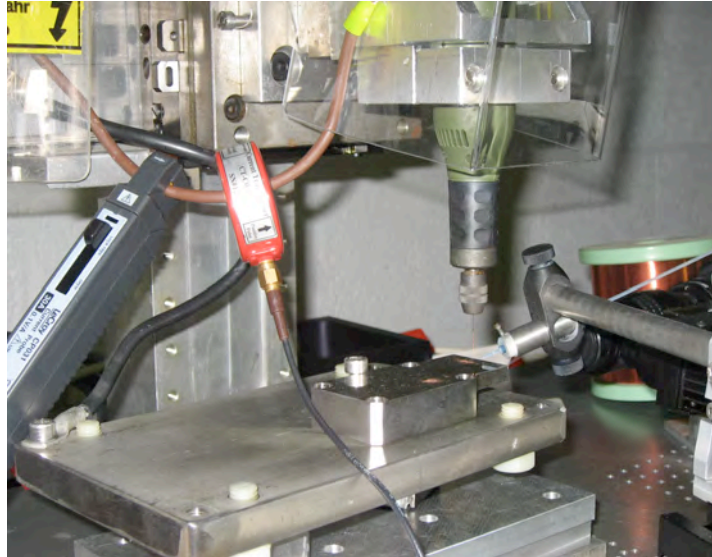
Test bed for Dry Electrical Discharge Machining (DryEDM)
